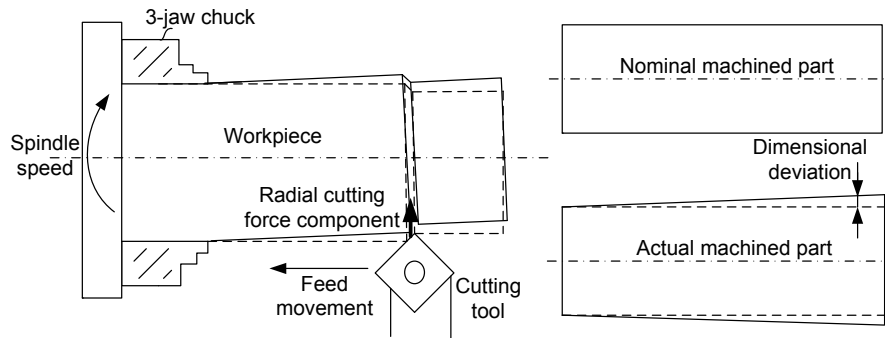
Example of workpiece-dependent errors due to cutting forces.
